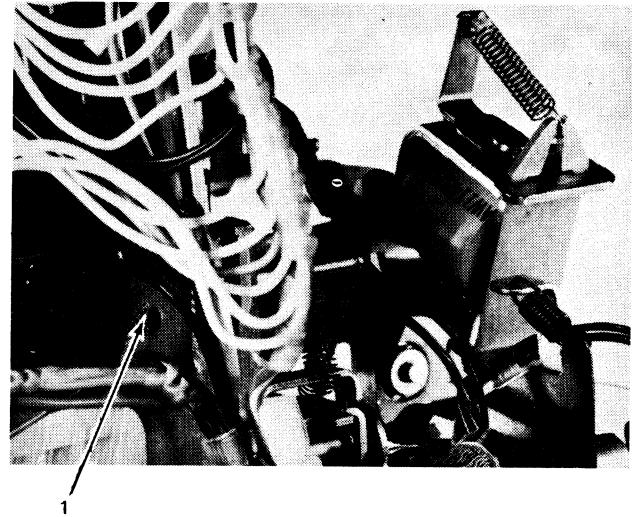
Keyboard Removal (Keyboard Roll Pin, Printer Tilted Up)
